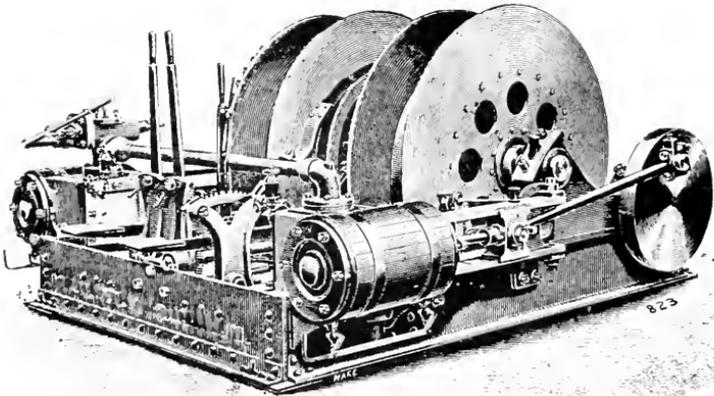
DOUBLE CYLINDER WINDING ENGINE ON IRON GIRDER FRAME.
